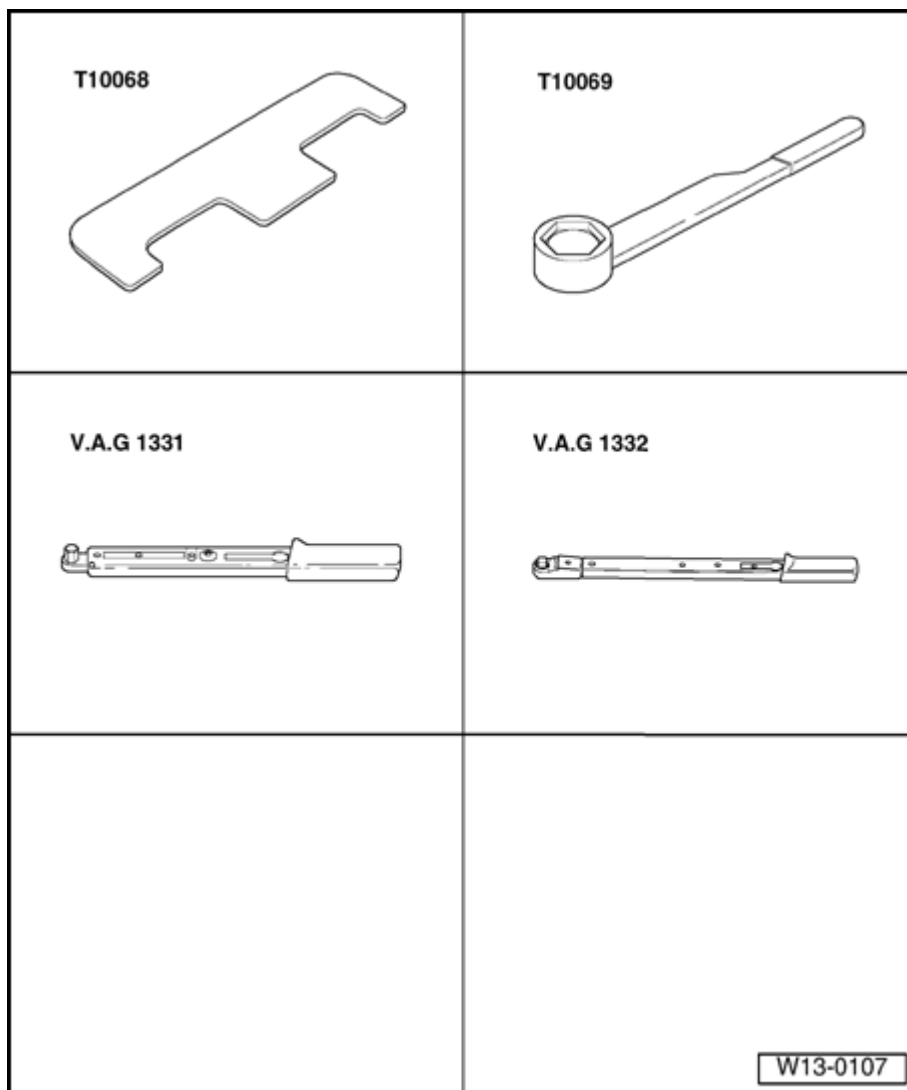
Identifying Special Tools - Valve Timing, Adjusting
